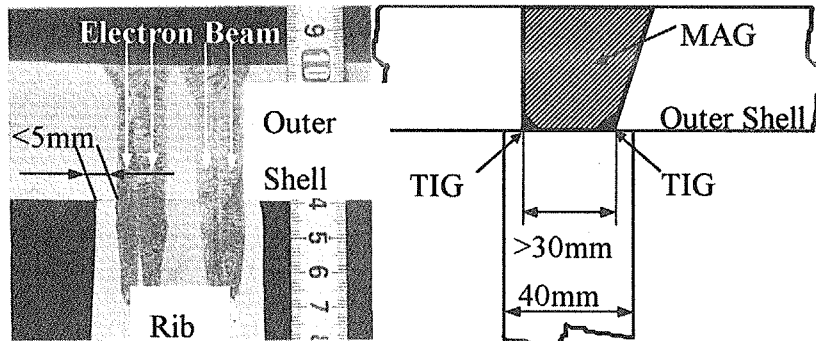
Example of partial penetration T-welded joint
